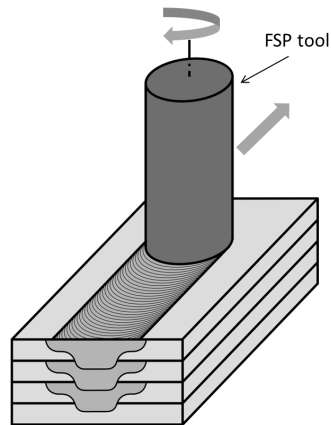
Principle of friction stir additive manufacturing (Schematic by N. Jimenez-Mena, inspired from Ref. [201]).
